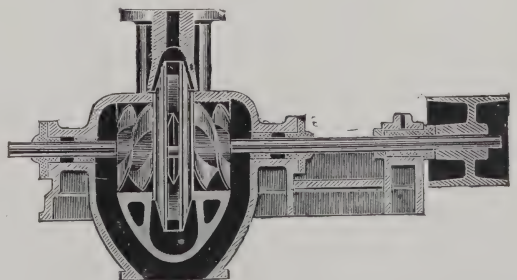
SECTIONAL END VIEW OF "HELICAL" CENTRIFUGAL PUMP, MADE BY MESSRS. JOHN CHERRY & SONS, BEVERLEY.
